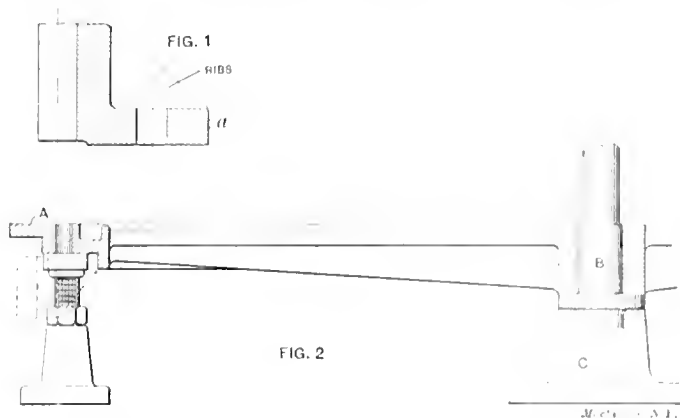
Section Gear Rim. Fig. 2. Half-section of Index Plate
